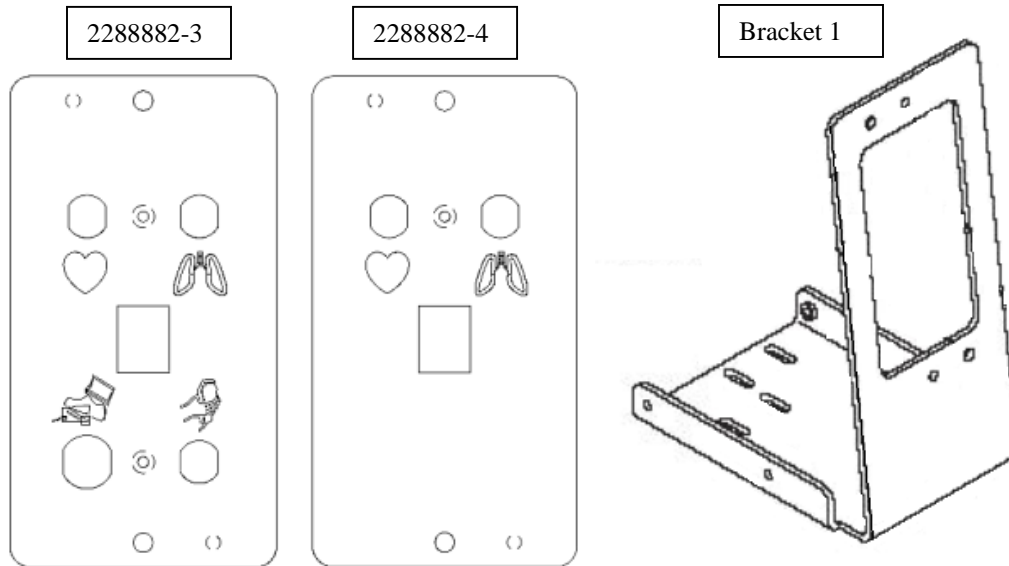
MOUNTING BRACKET 1 AND COVER PLATES
